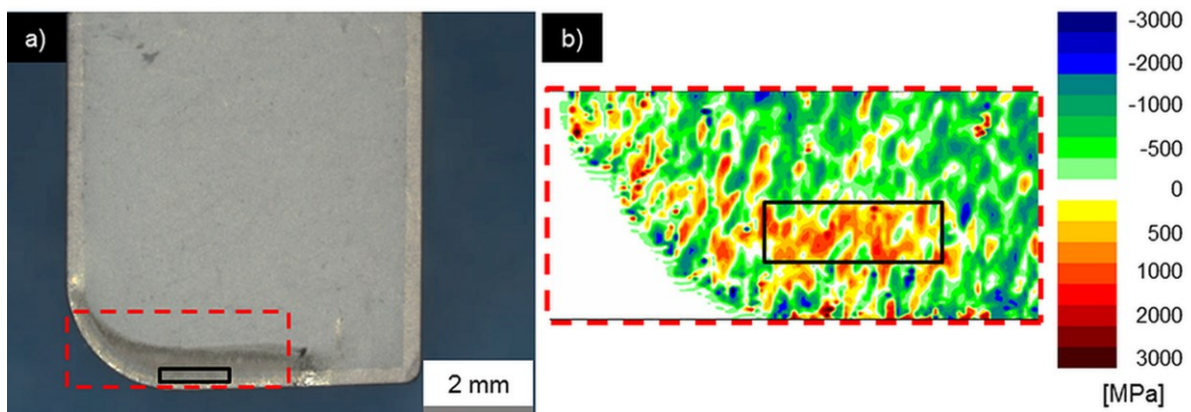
Results of stress measurements via synchrotron X-ray radiation taken from [4]. Top view of the rake face of a used milling insert with 1000 tool-workpiece contacts. Dashed frame in a) indicates the area of residual stress measurement shown in b) that represents a position resolved map of residual stress acting in horizontal direction in the WC phase. Solid frame in b) indicates the area with detected significant tensile residual stress buildup [4]. For the interpretation of the stress colored scale bar we refer the reader to the online version of this article.
